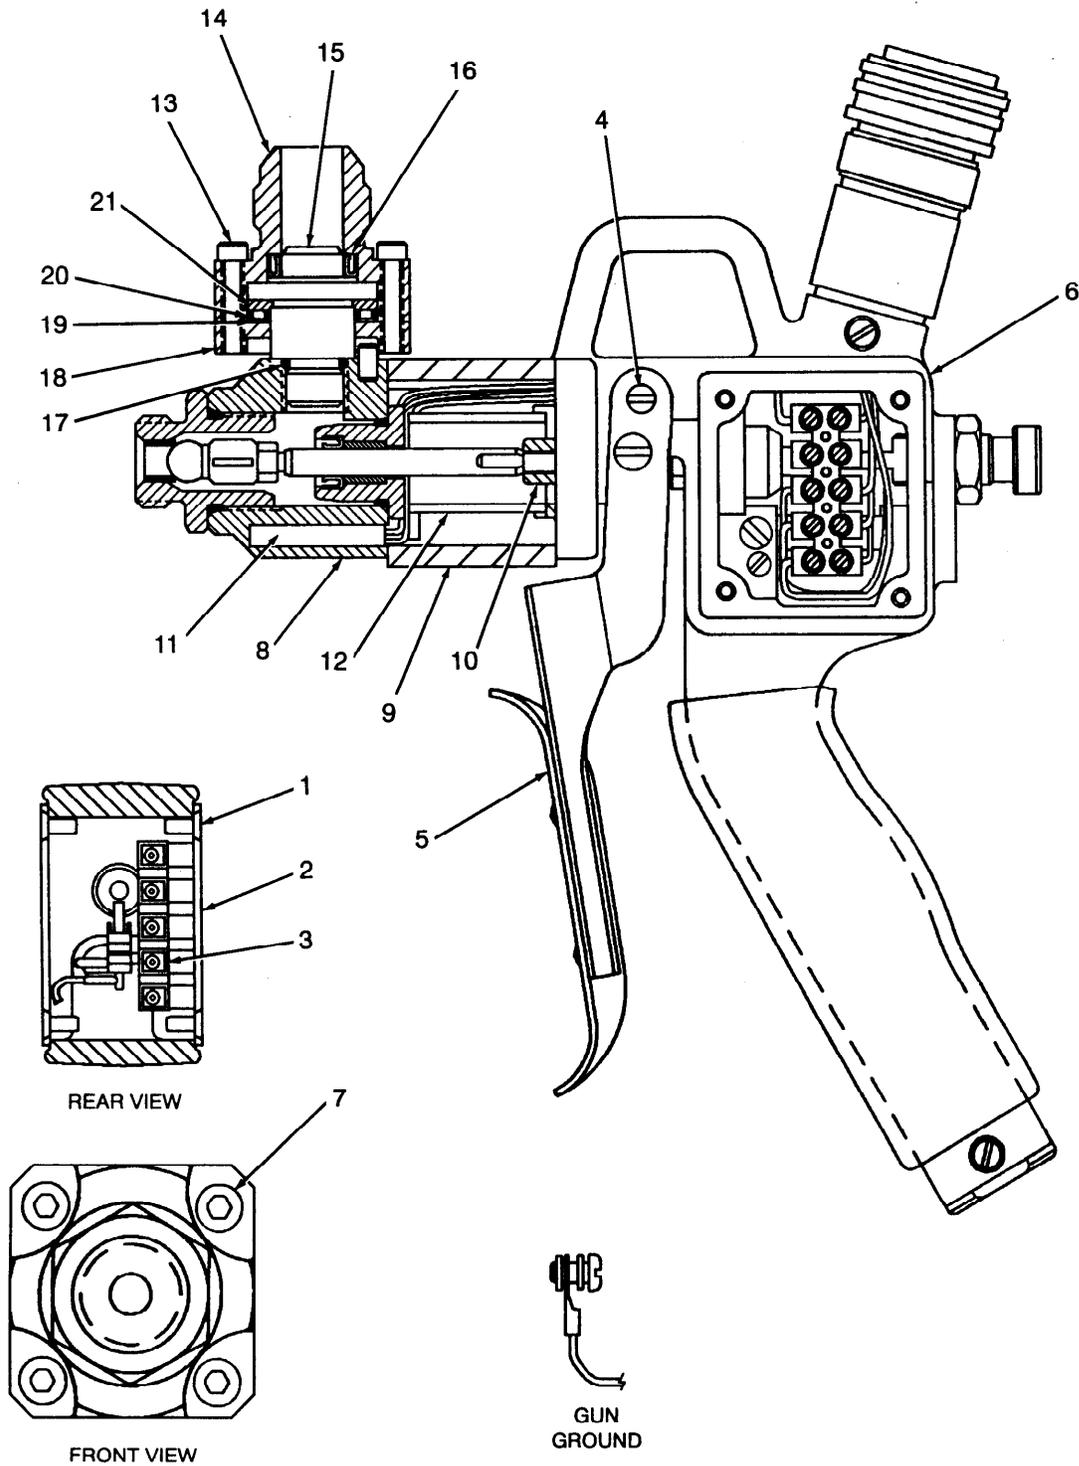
Heated, Switched, Top Feed Gun Cutaway
